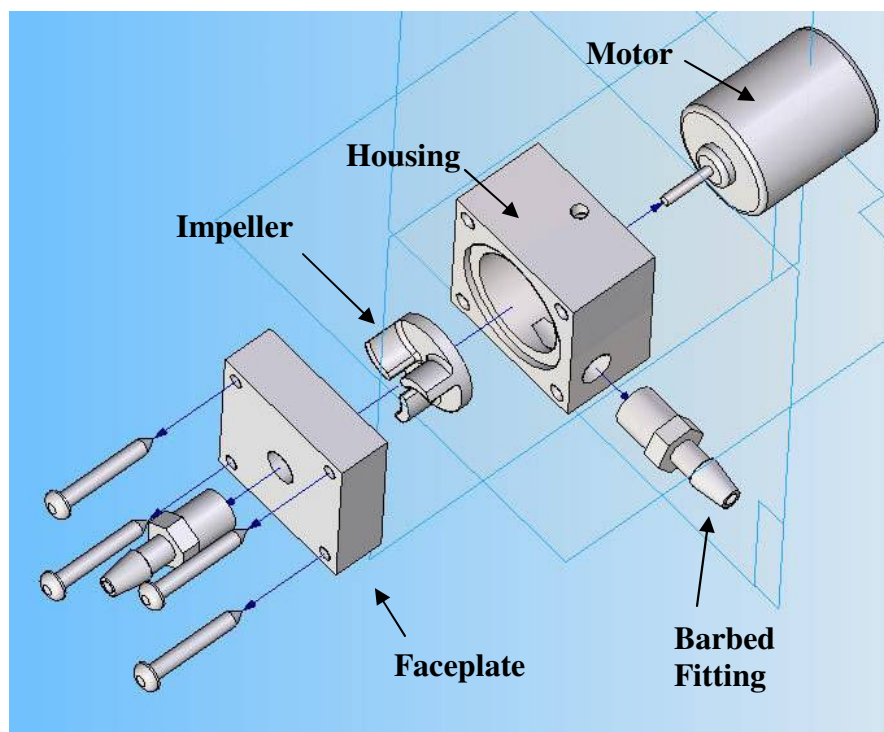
Exploded Solid Assembly of Centrifugal Pump
